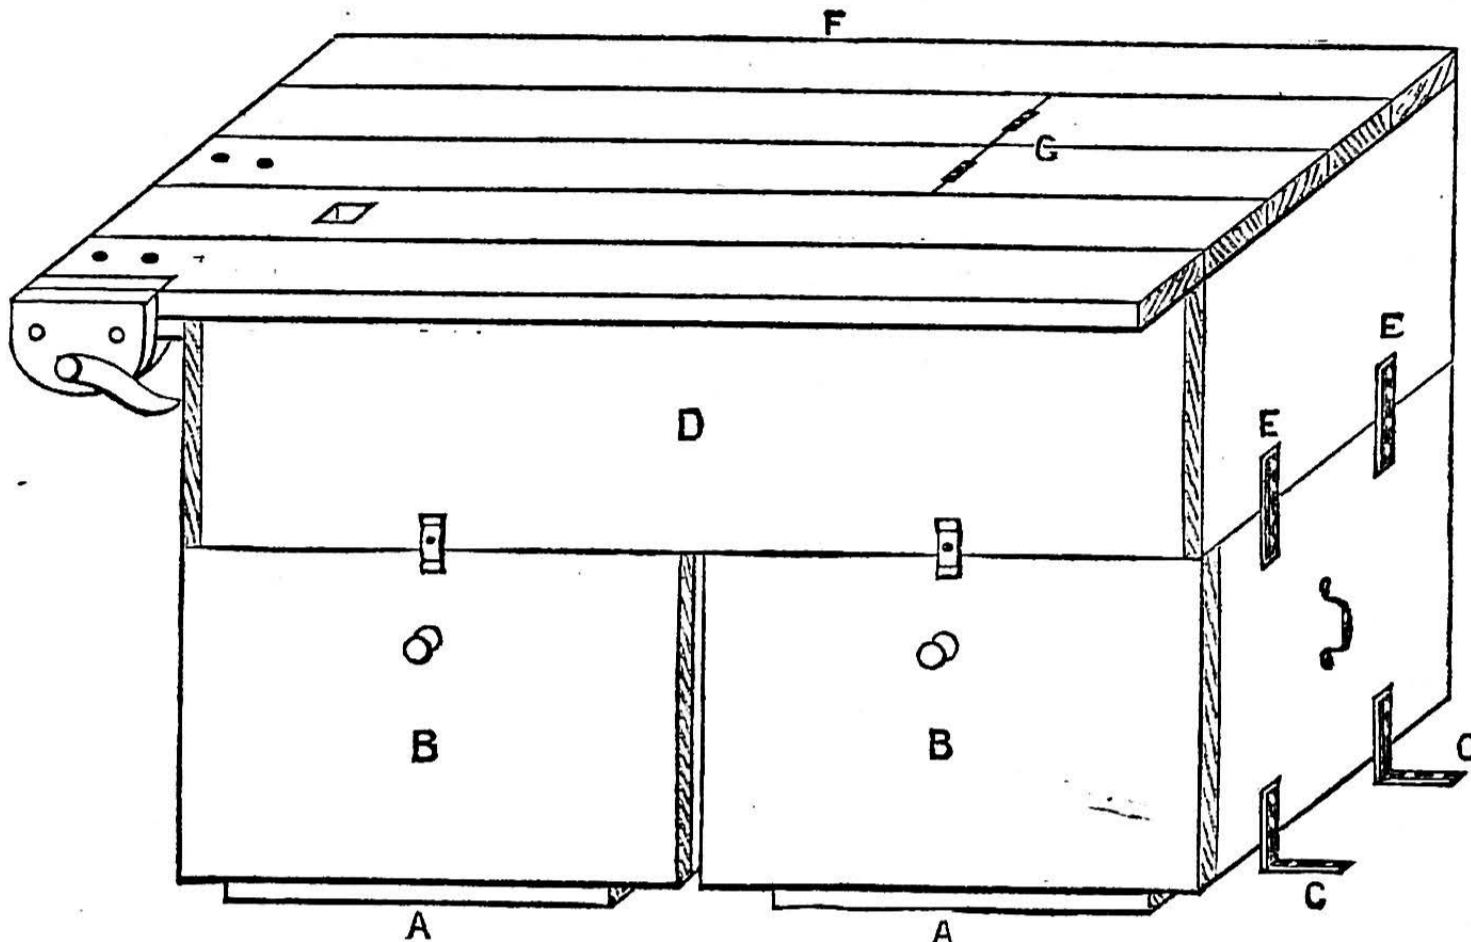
Bench complete—A, Covers of Packing-Cases fixed on Floor; B, Boxes fitted as Tool Chests; C, Angle Irons; D, Long Packing-Case fastened to Boxes; E, Strips to help fix ditto; F, Bench Top; G, Hinge Planks.
